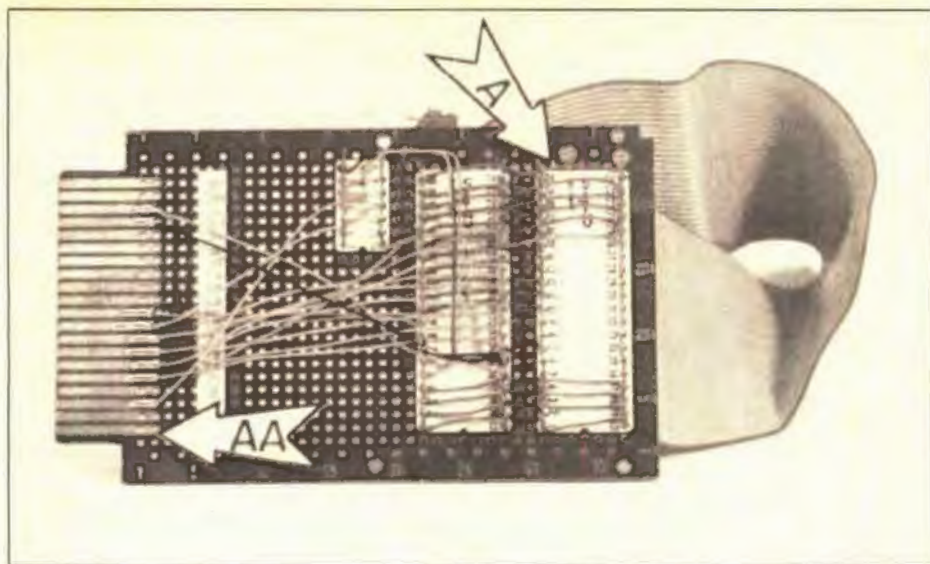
Bottom of interface board. A: Bottom of 40-pin DIP socket. AA: Pin 2 on circuit board.
